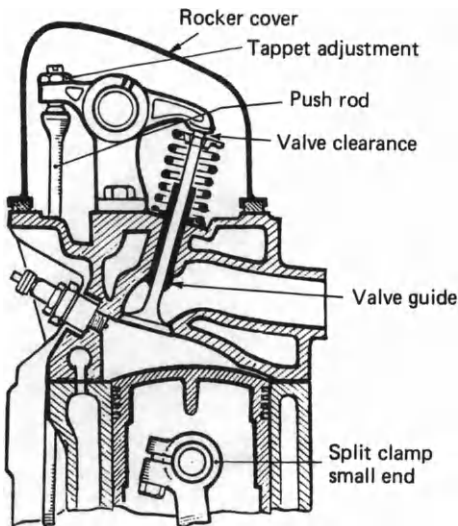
Section through cylinder head of an overhead valve or I head engine
